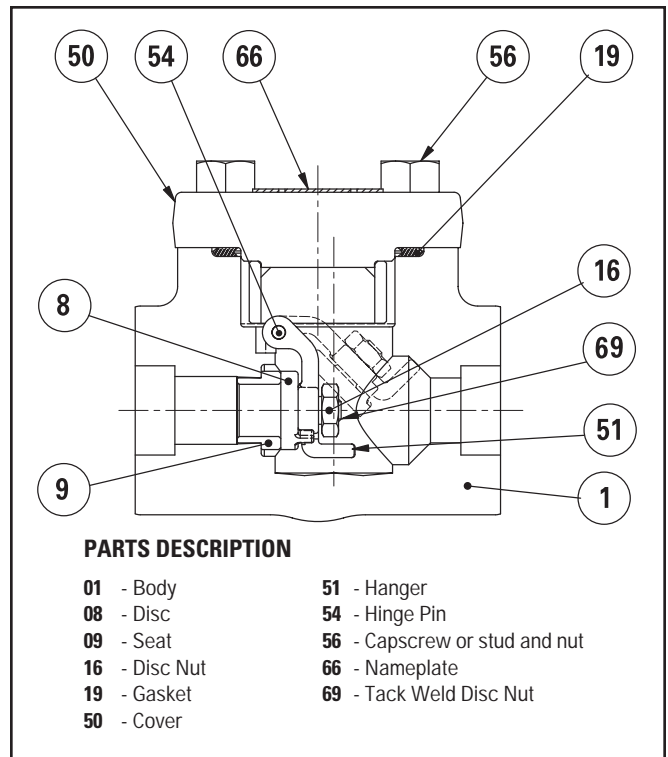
C Bolted Cover Swing Check - Integral hinge
